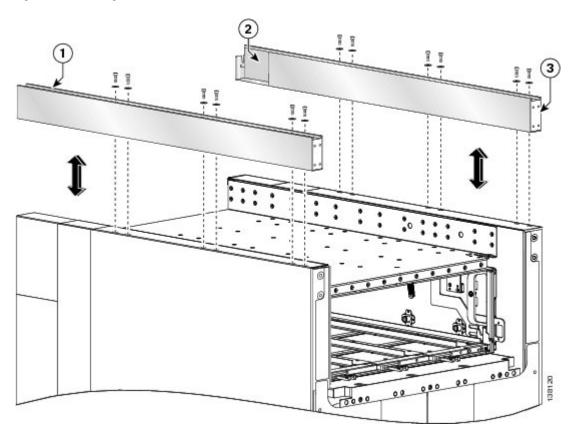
Removing the Front (SFC) Side Upper Grille Support and Power Shutoff Extenders
